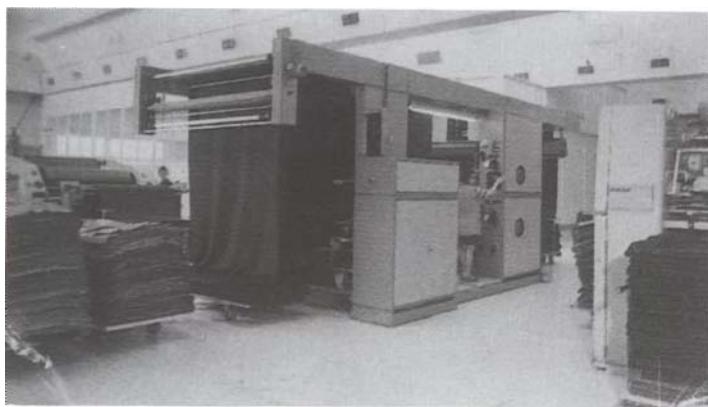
Fully automatic shearing range [Courtesy of Swiss Association of Machinery Manufacturers (VSM)].
